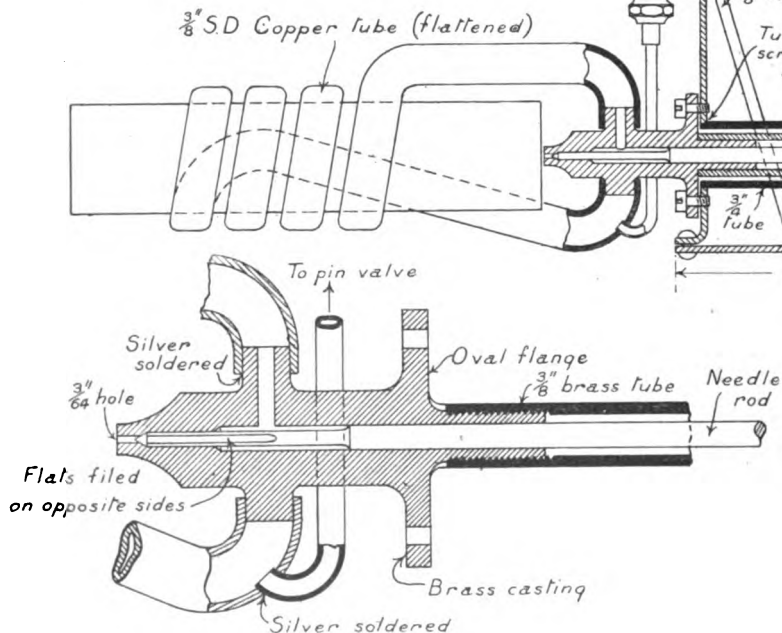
ENLARGED VIEW OF NIPPLE CASTING.
